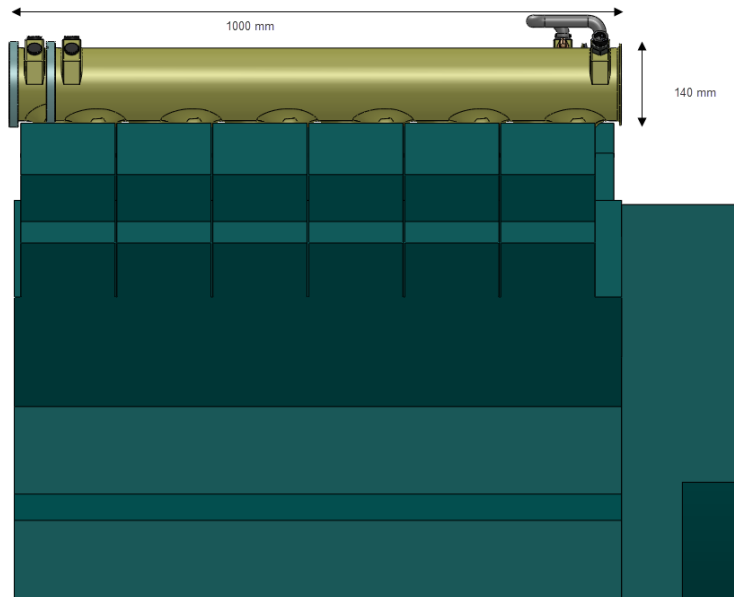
Rough dimension drawing for Budget Viper concept, side view
